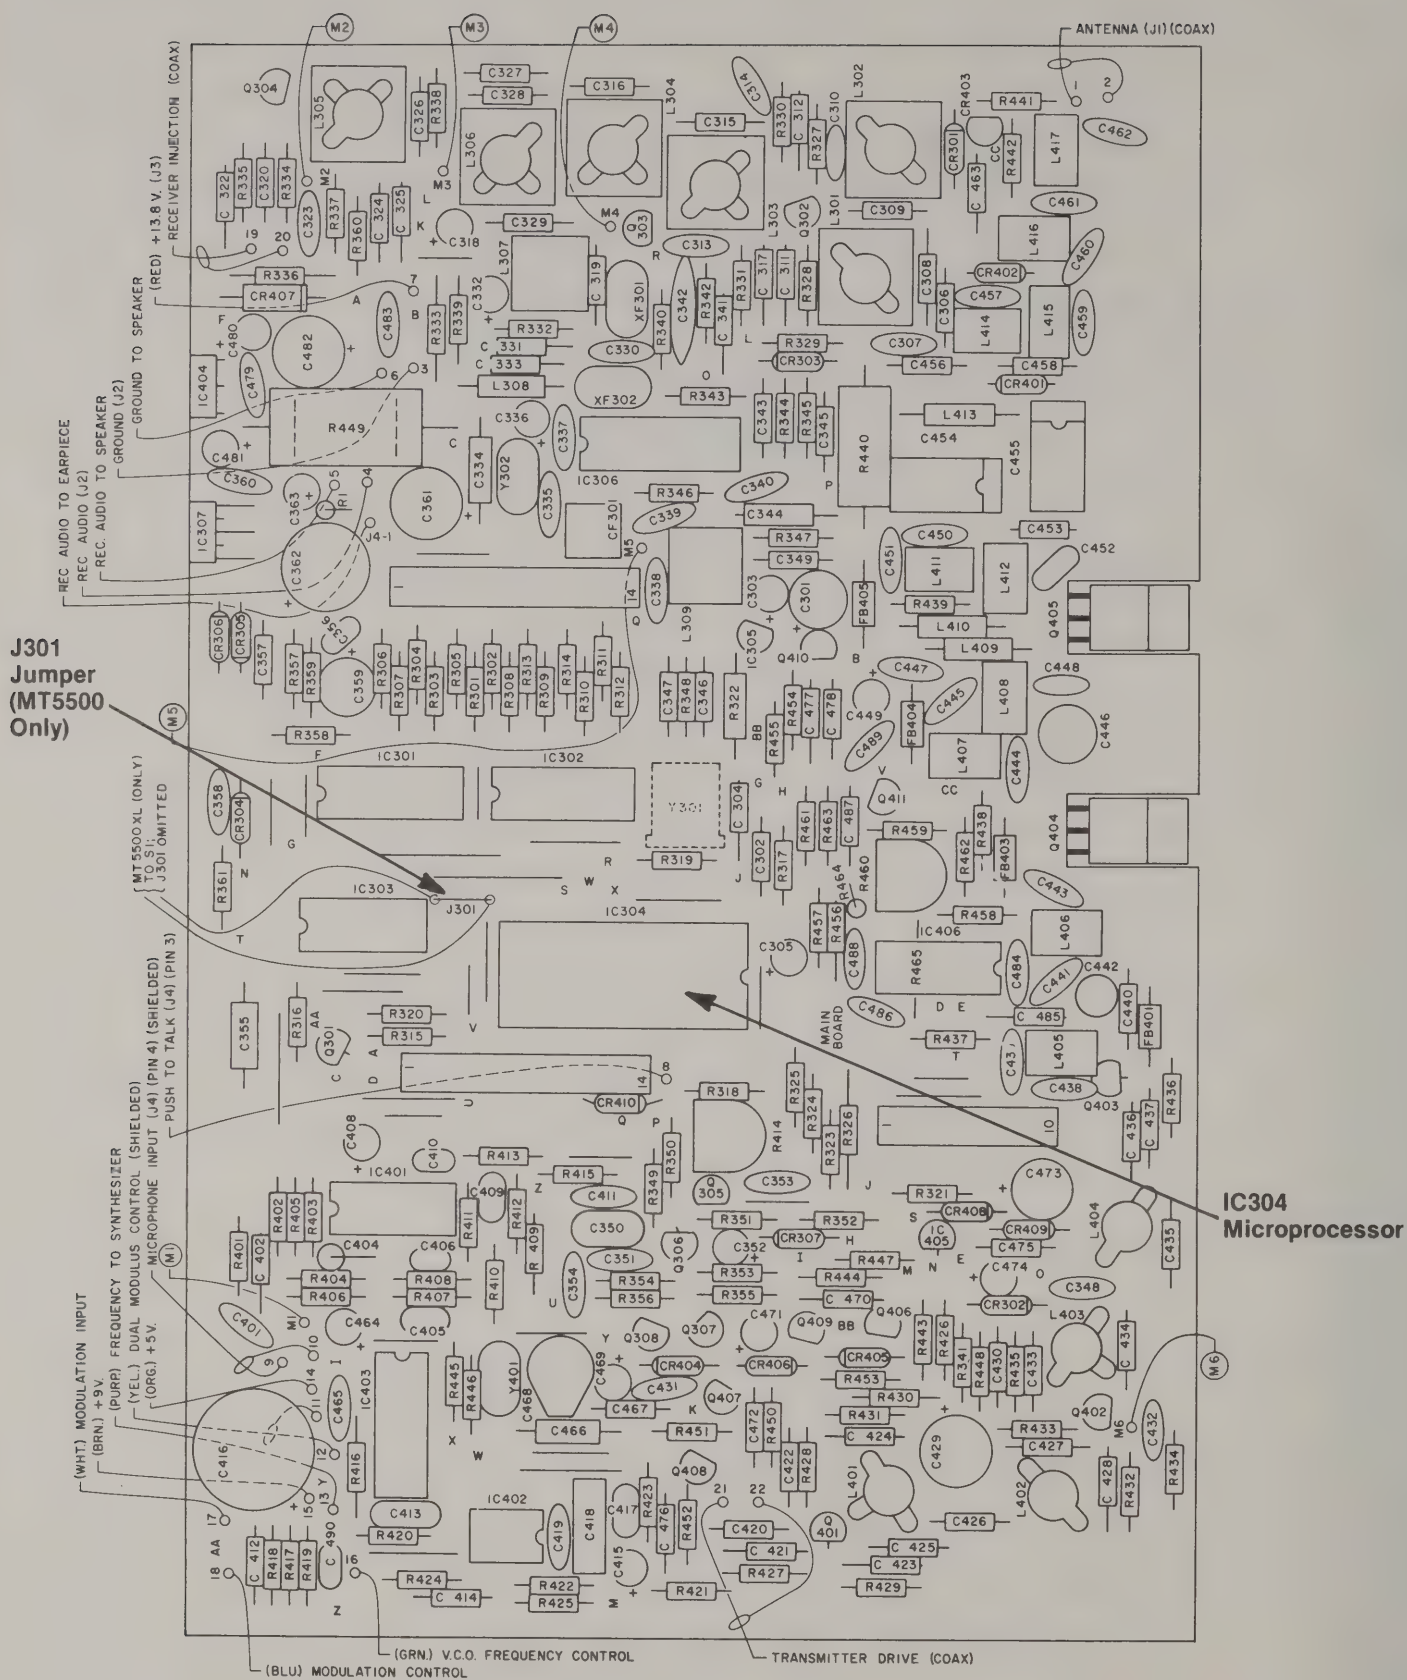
A. Parts Placement, Main PCB Assembly: Top View.
